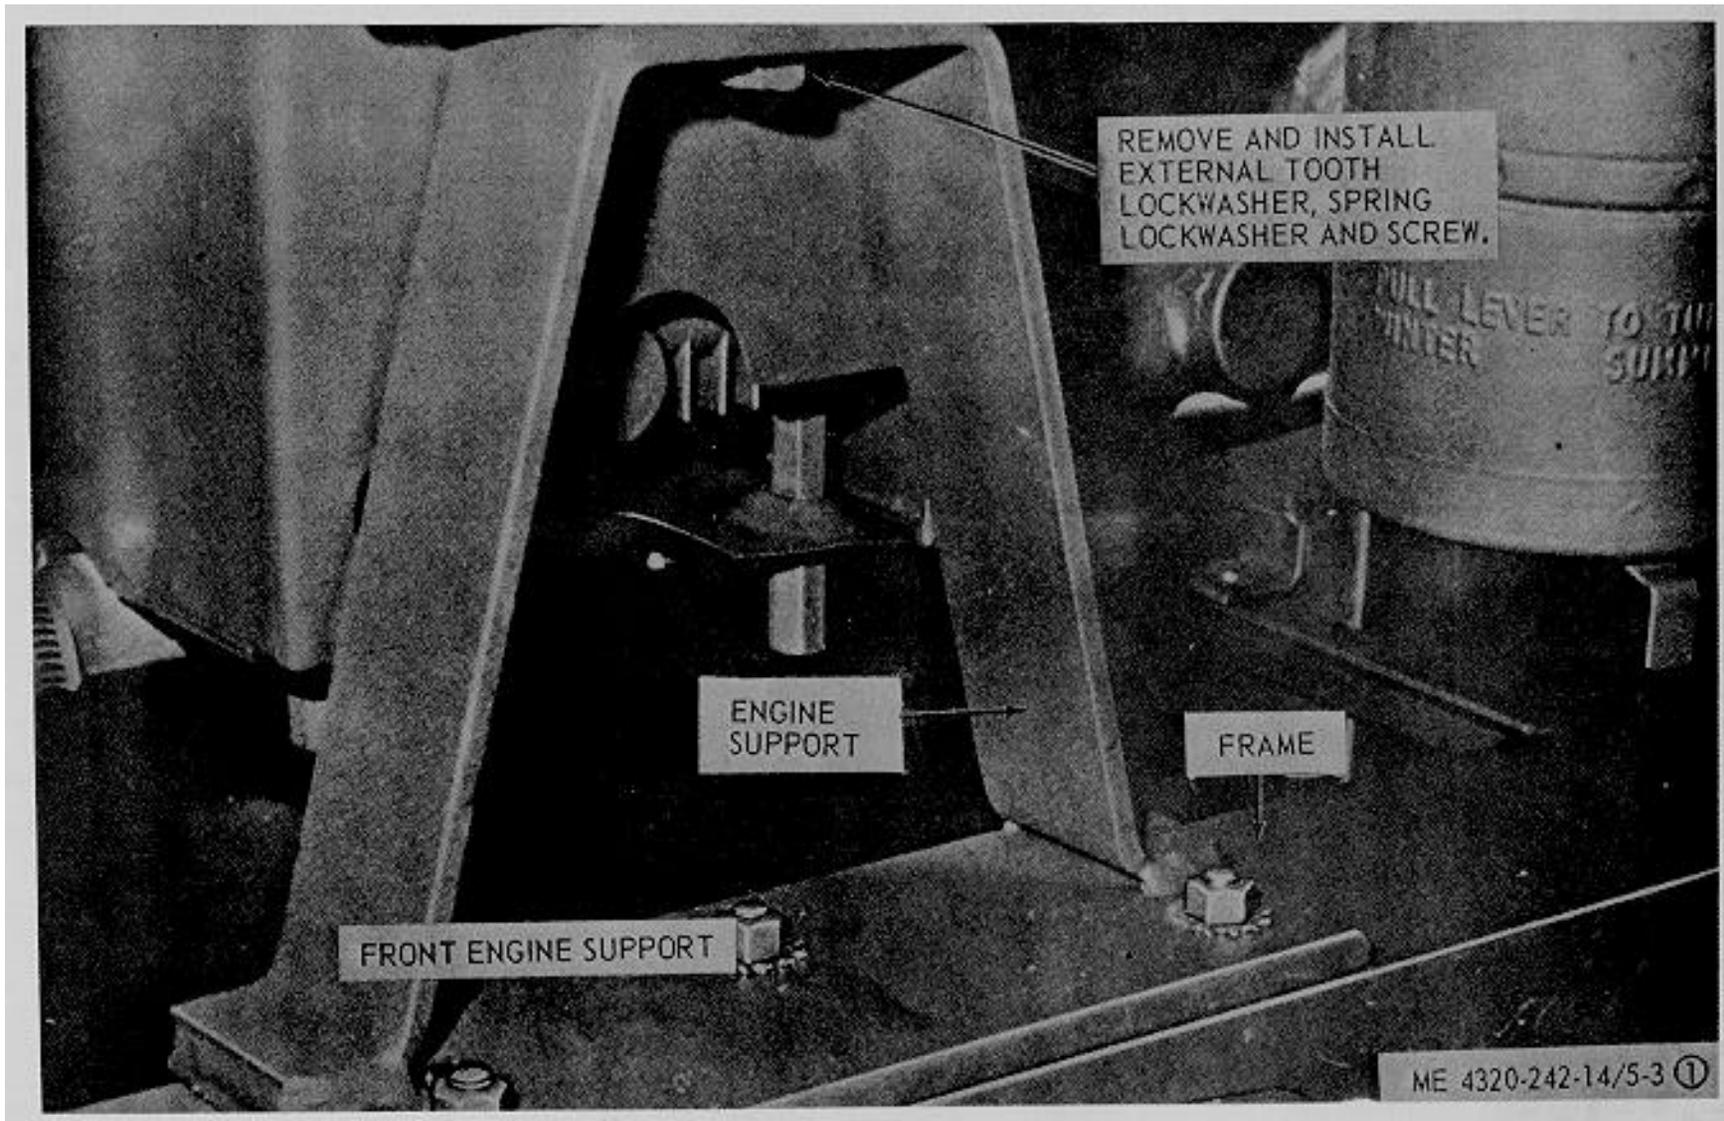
Engine, removal and installation (Sheet 1 of 2).
